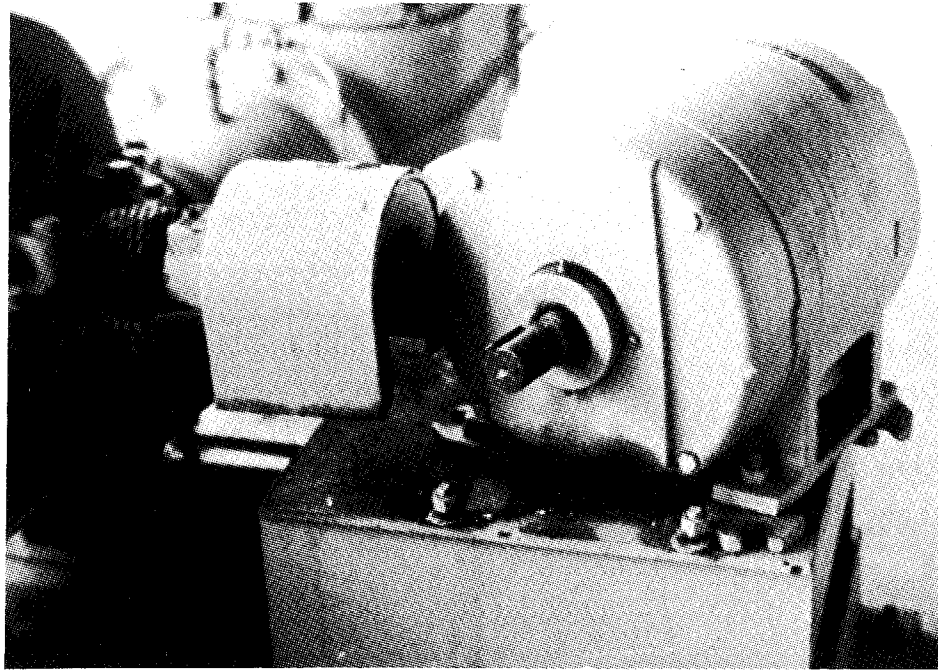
Unanchored Drill Press Susceptible to Overturning Damage
